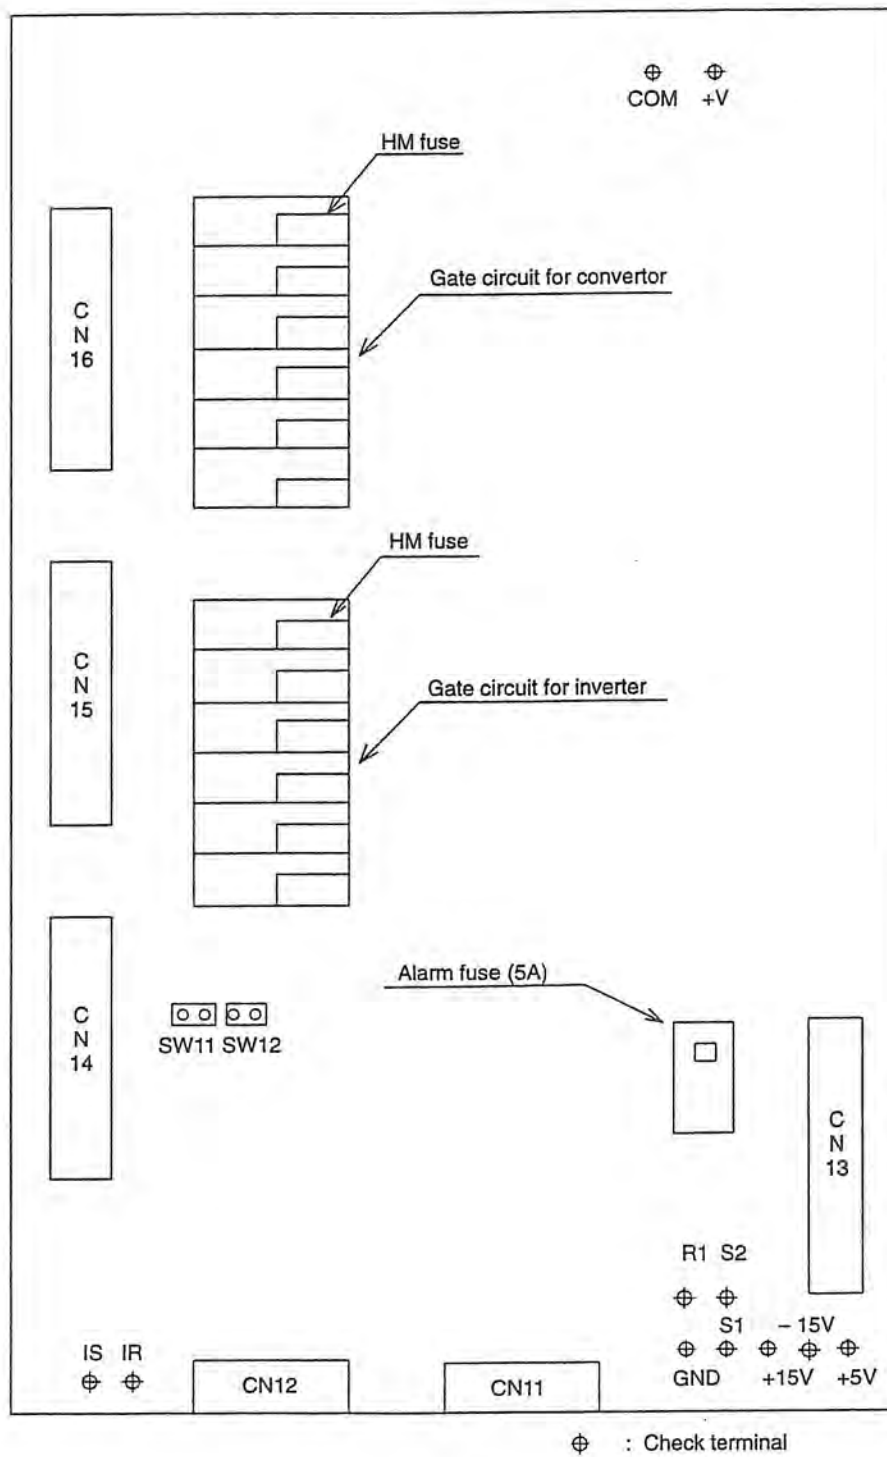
Arrangement of Major Component Parts on VACIII GD Board for VACIII-D6 Unit
